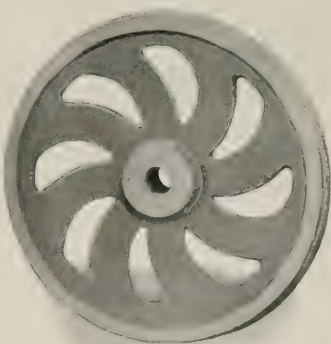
33-IN. 425-LB. MOTOR CAR WHEEL.
